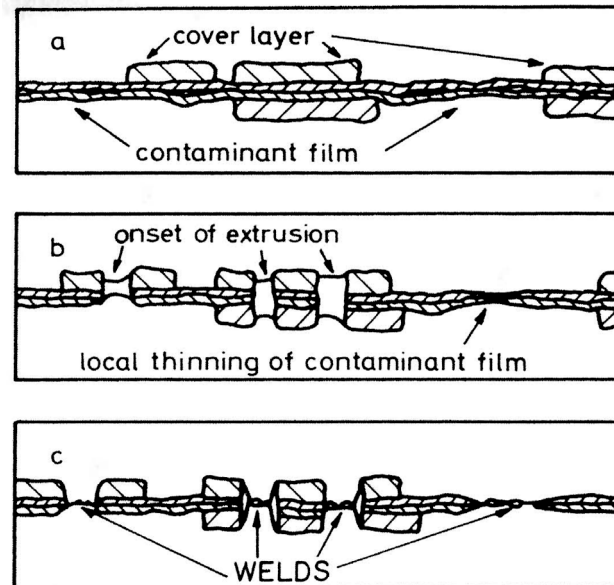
Schematic outline of the different steps involved in bond formation at the interface:- a) break-up of cover layer b) extrusion onset c) weld formation [22]
